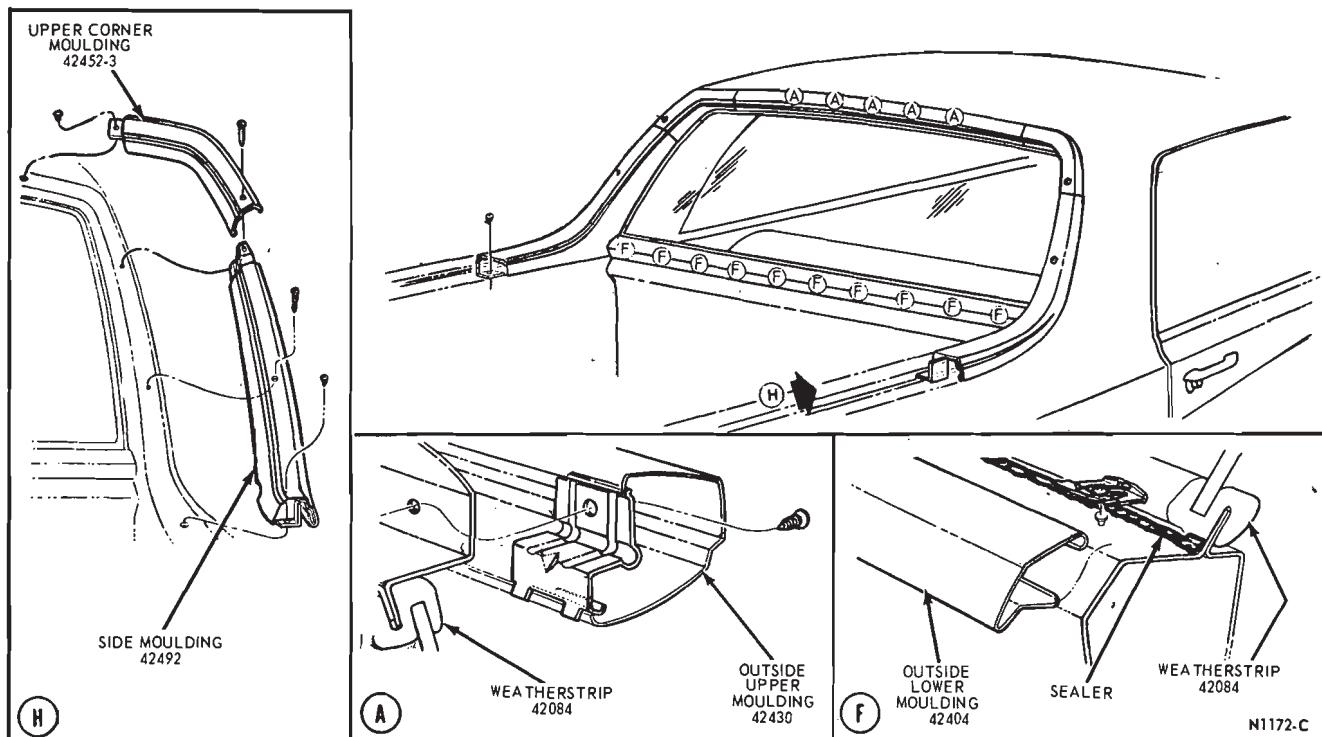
Back Window and Exterior Moulding Installation—Fairlane Model 66
